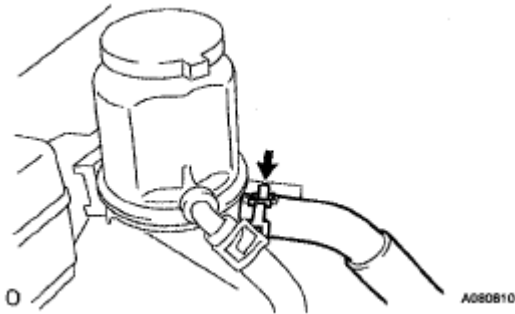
Identifying No. 1 Oil Reservoir Pump Hose
